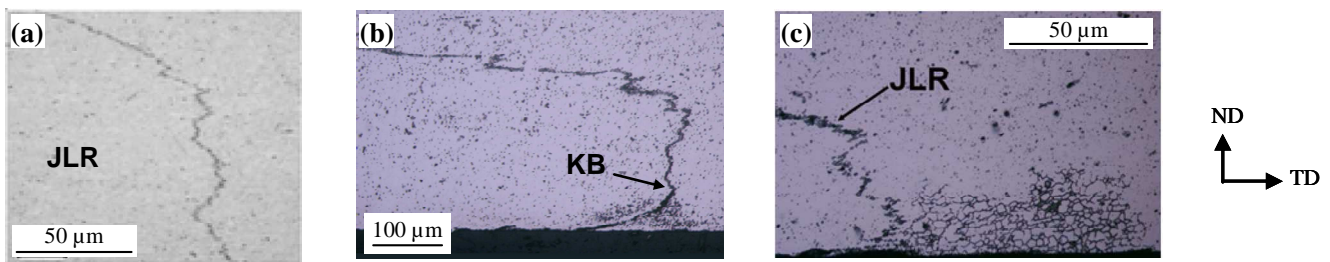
Cross-section observations of weld defects: (a) JLR; (b) KB (bottom) and JLR (upper, nearly horizontal part); (c) etched grain boundaries (bottom) and JLR in a Gap3 bearing weld
